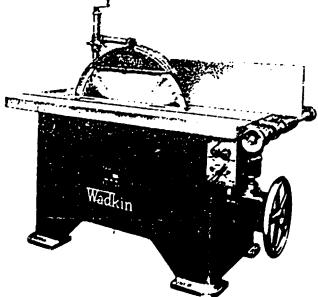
Heavy duty circular saw bench of the resaw type. Points of note on this particular machine are, guard and adjustments, accessability of switch gear, screw adjustment to fence, encased raising and lowering gear to table.
